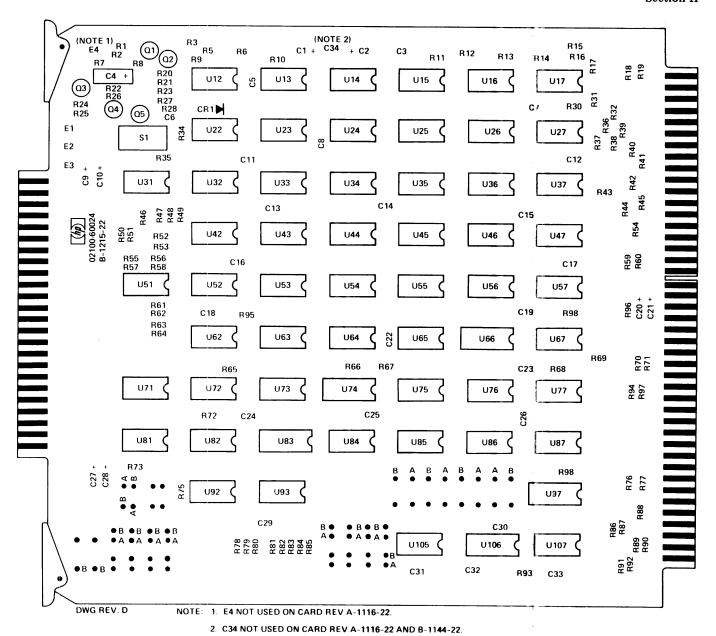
A7 I/O Control Card, Parts Location Diagram
